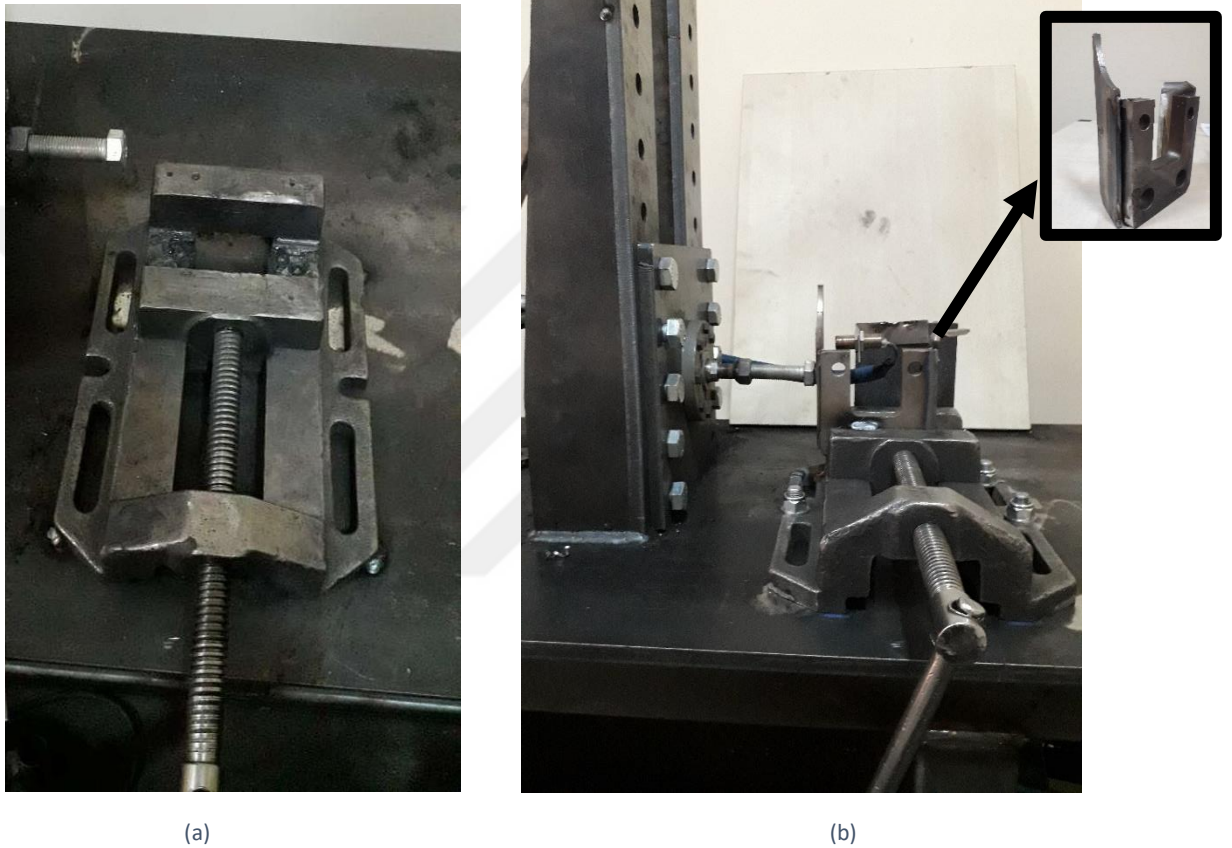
The Vise (a) Top View (b) The Vise with a Fixed Sample
